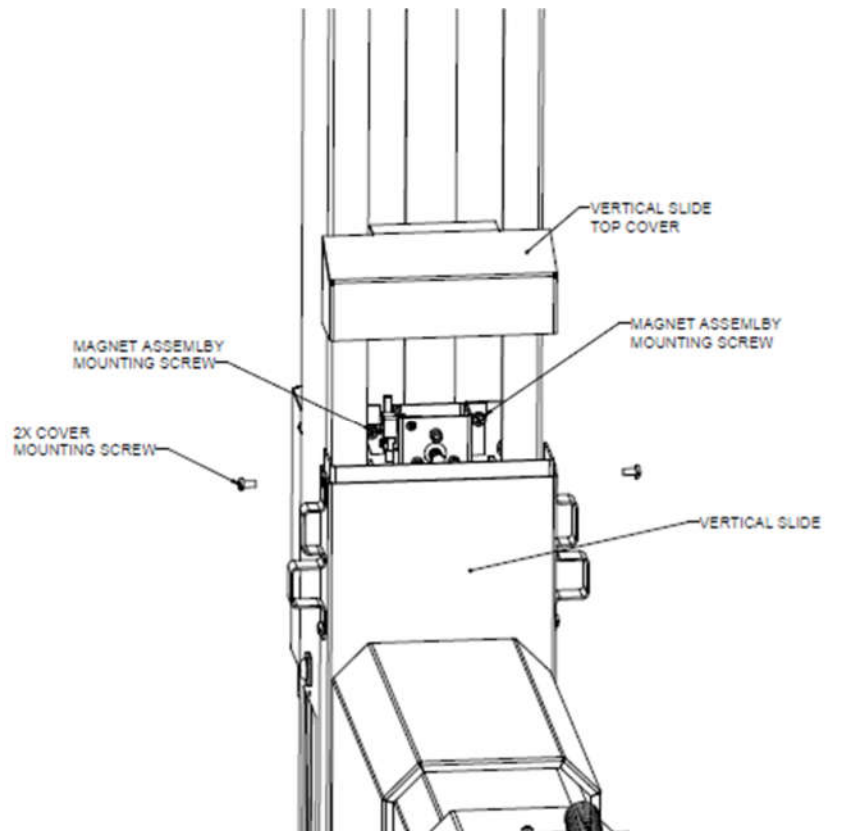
VERTICAL LOCK MAGNET ASSEMBLY
